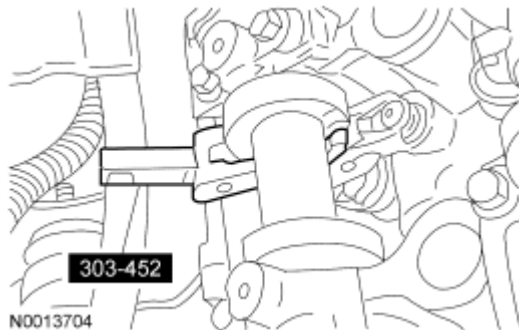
Using Special Tool (303-452) To Compress Valve Springs
